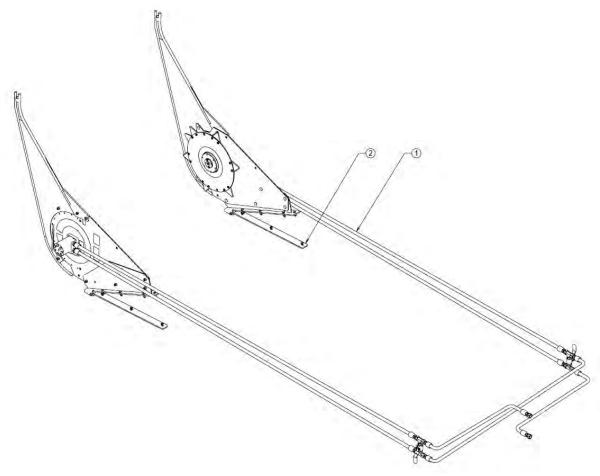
Roto-Shear Universal Header Kit (27000-01)
